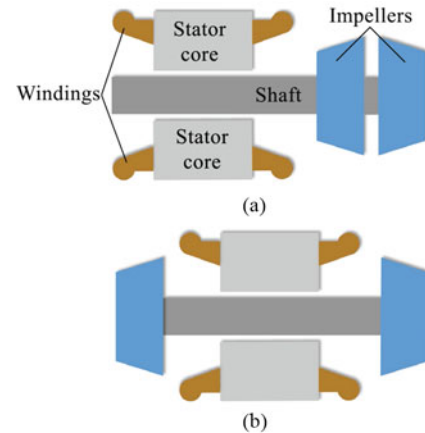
Impeller arrangement of a two-stage compressor: (a) two impellers are mounted at one end of the machine and (b) impellers are mounted at both ends of the machine.
